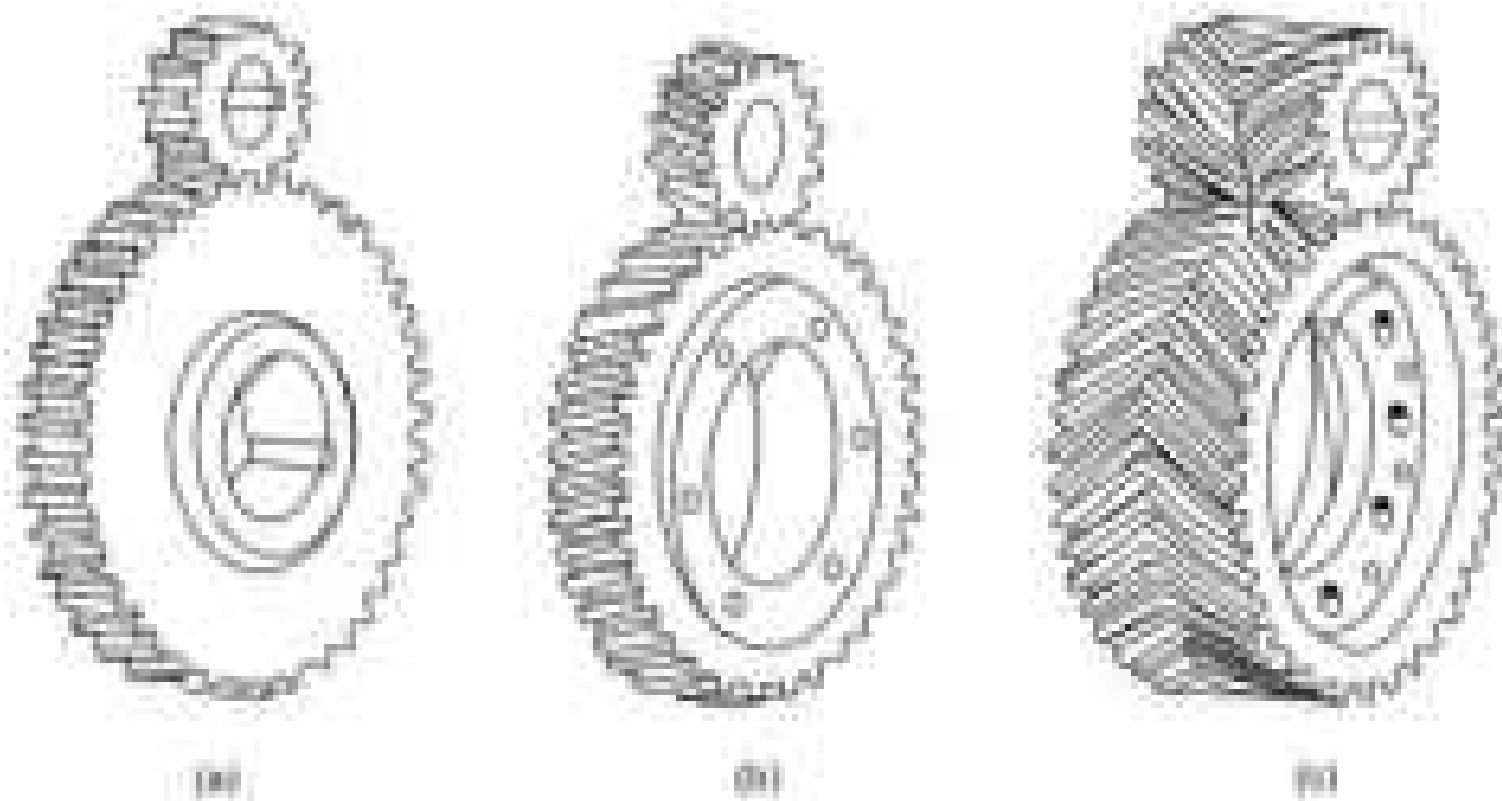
Gears: (a) Spur (b) Helical (c) Herringbone
